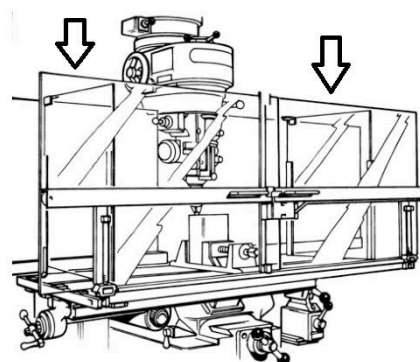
Parts of Universal Milling Machine (learnmechanical.com/milling-machine)
